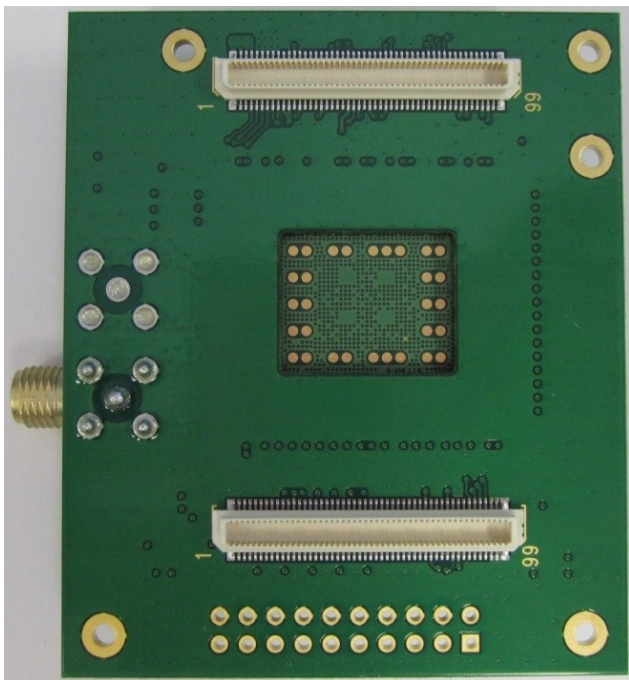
AirPrime SL6087 Socket-Up Board with the AirPrime SL6087 Embedded Module (Bottom View)
